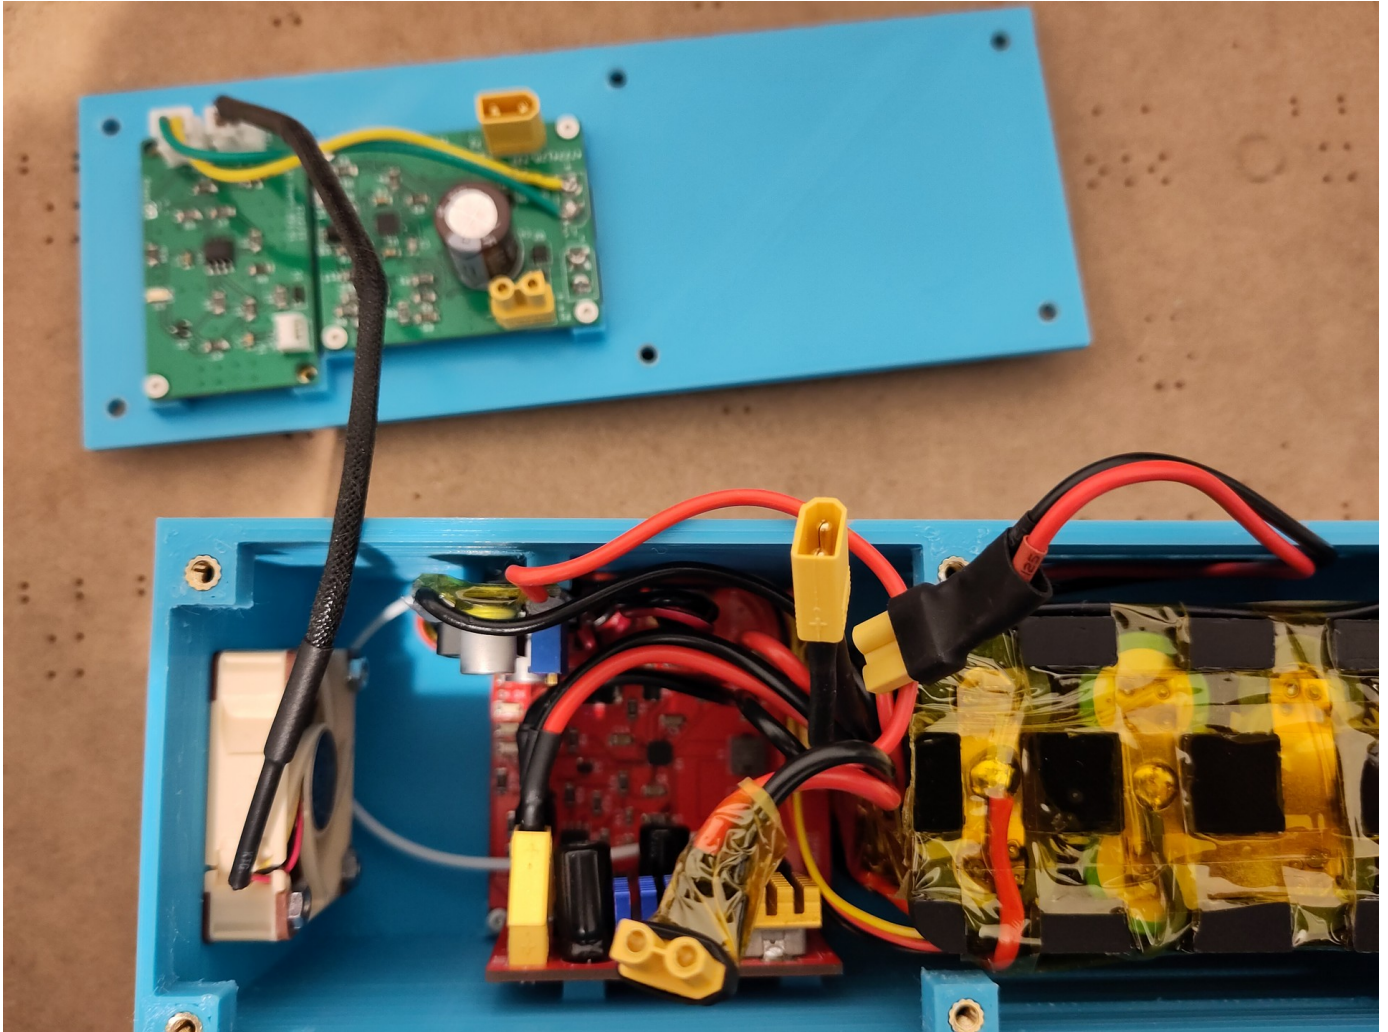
Cooling fan controller and switcher boards assembly on enclosure lid
